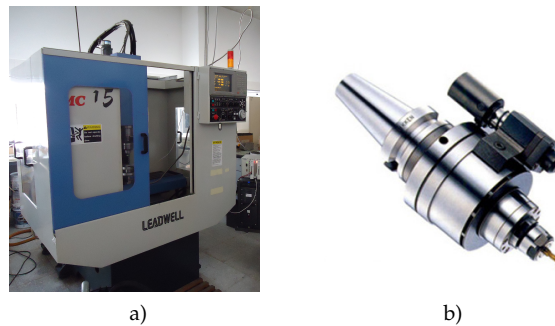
Drilling equipment: a) CNC machining centre – LEADWELL VMC-15; b) Spindle speeder – NIKKEN BT30-NX5-153.
